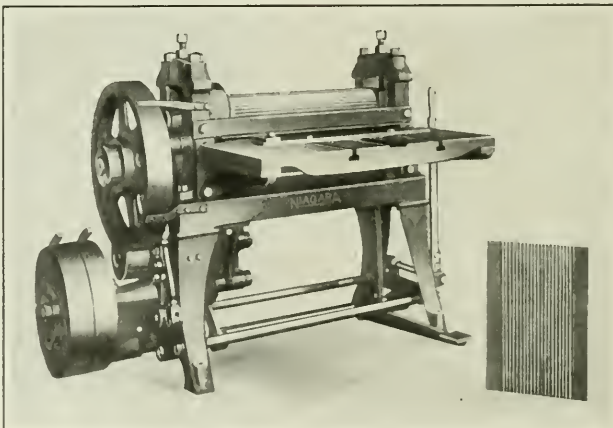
Corrugating Machine on which the First Operation on the Blank is performed
